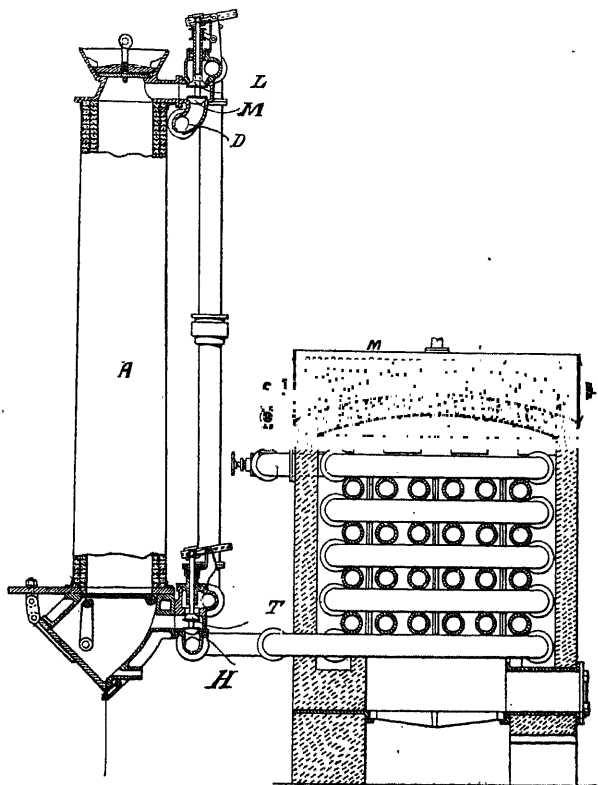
Section of "Lamplough" Retort and Superheater.
